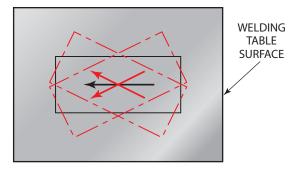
Change the plate angle to find the most comfortable welding position.
